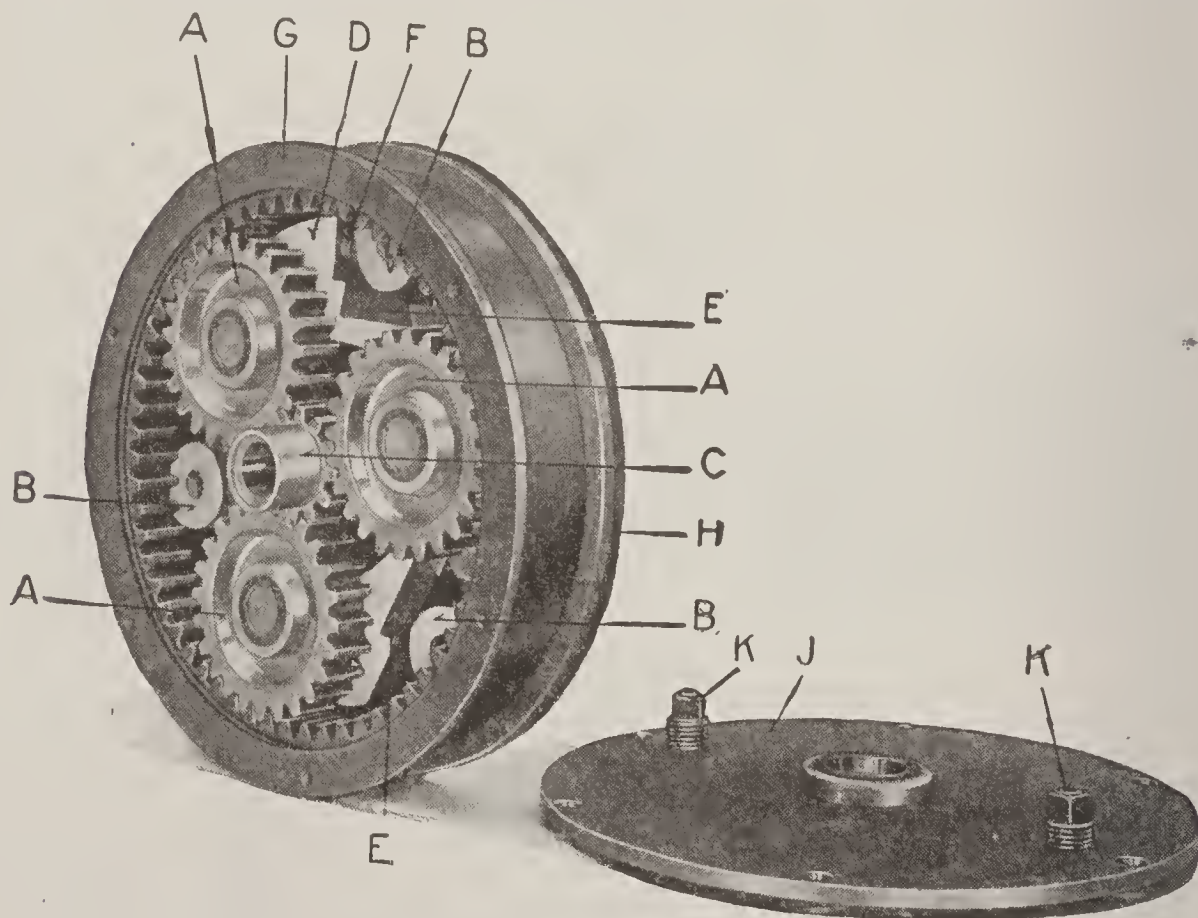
Assembled Planetary Gear. Letters same as Fig. 346
